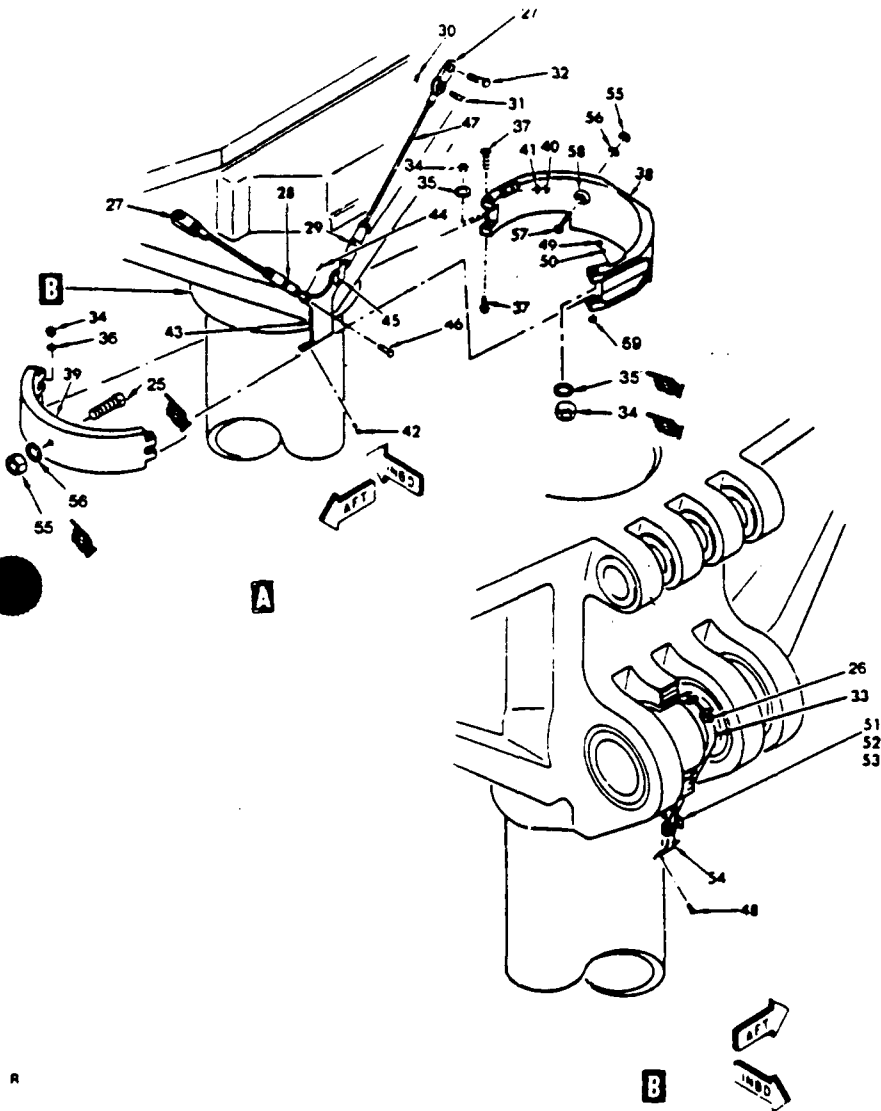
RH Aft Strut Assembly (Sheet 2 of 18)
